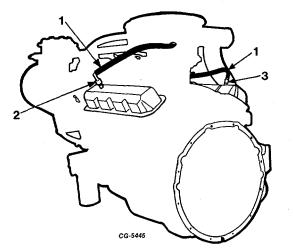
Flame Arrestor and Crankcase Ventilator Valve Installation
